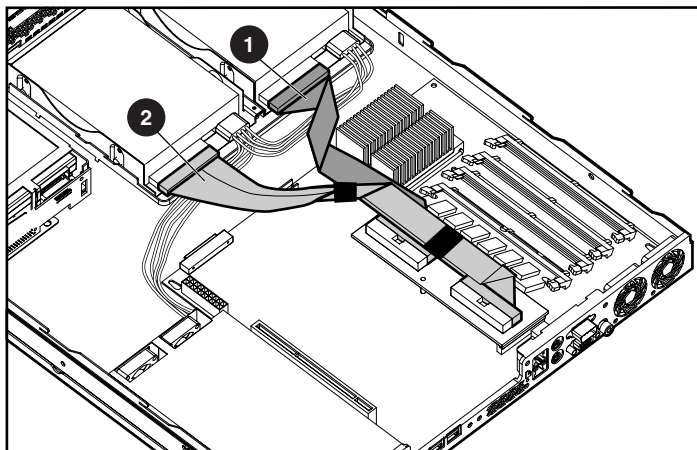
ATA drives connected properly to the ATA module on the system board (center wall and PCI riser board assembly removed for clarity)
